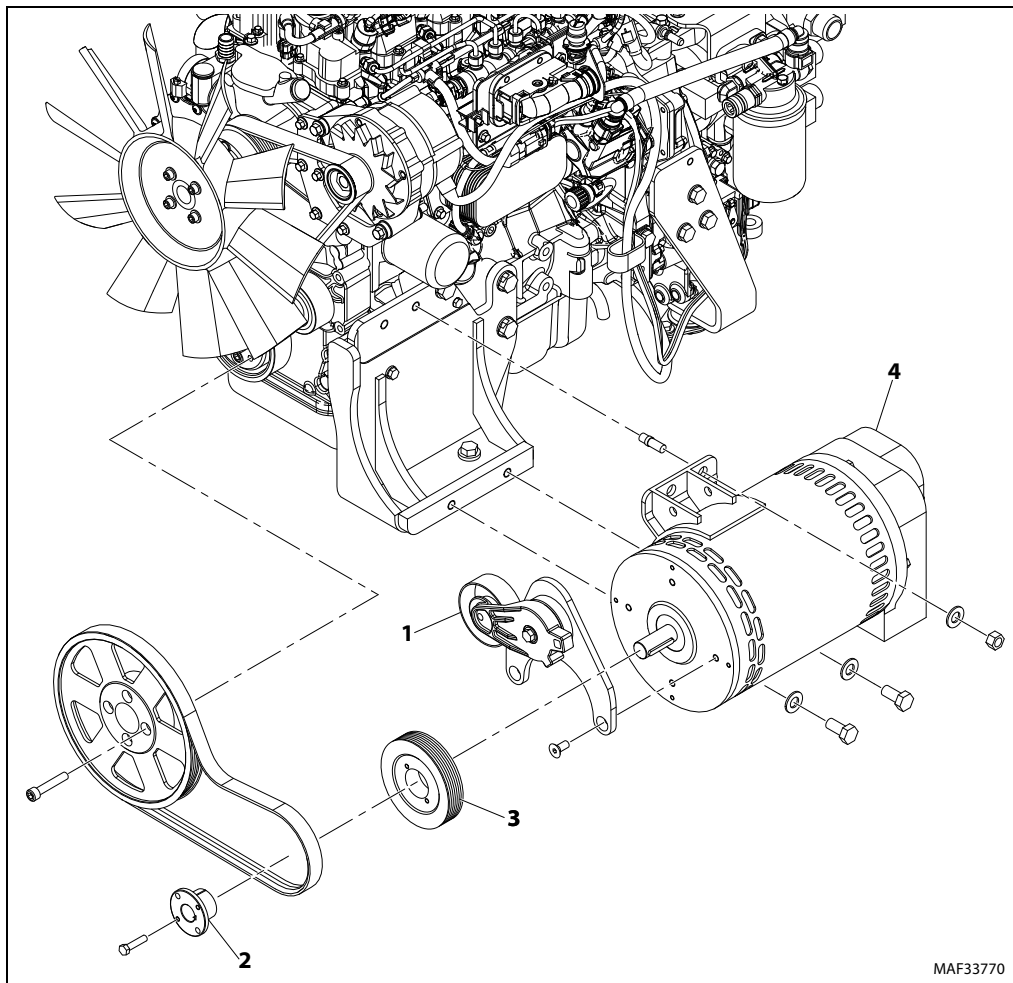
Generator and Pulley (7500W and 4000W) - Deutz TD2.9
